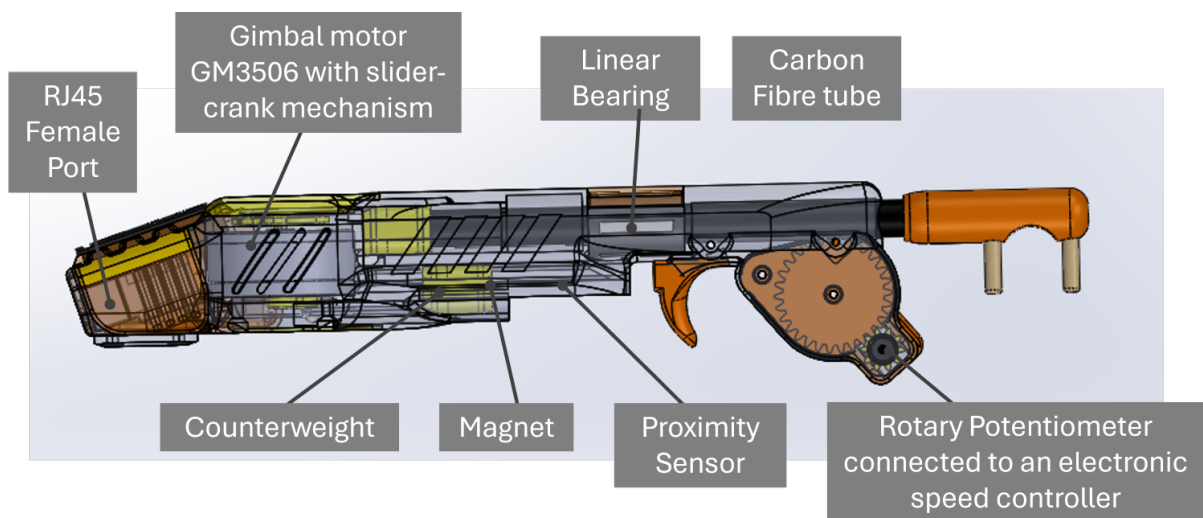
Final 3D CAD assembly of Shaker V2.0
